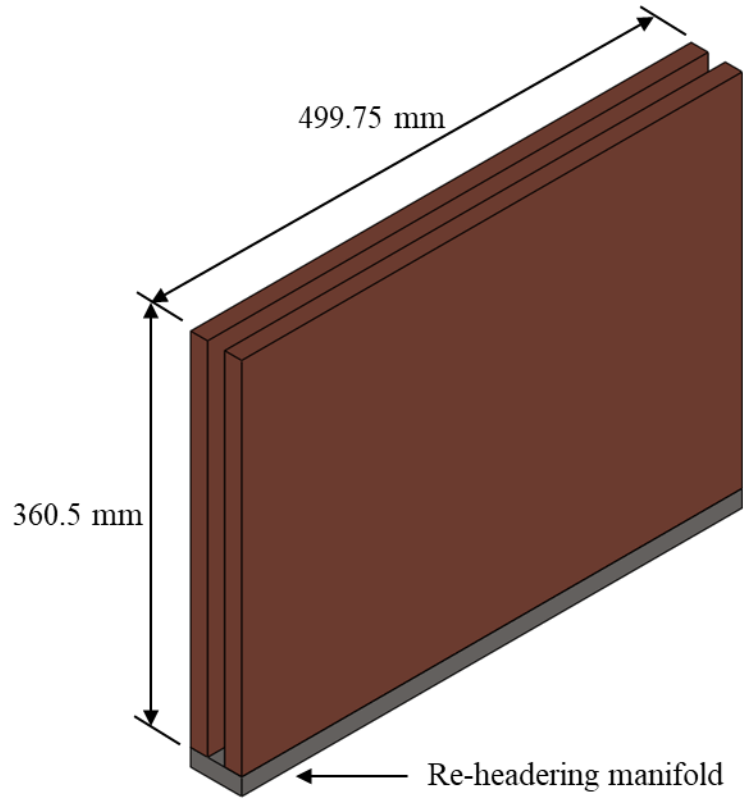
Rough appearance of the bulk dimensions of the lightest design with re-headering manifold.
